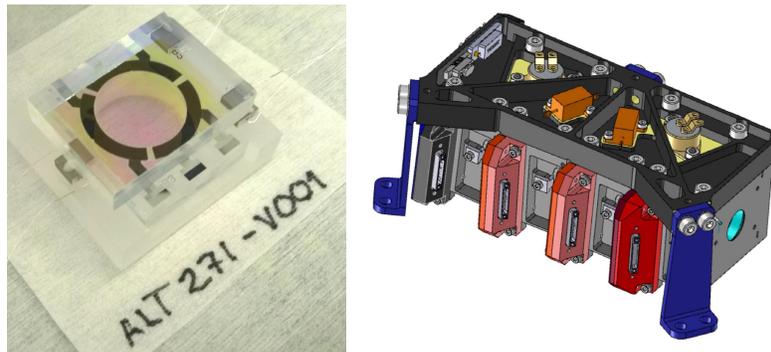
FPI unit mirrors assembly and design of the overall FPI assembly integrated
